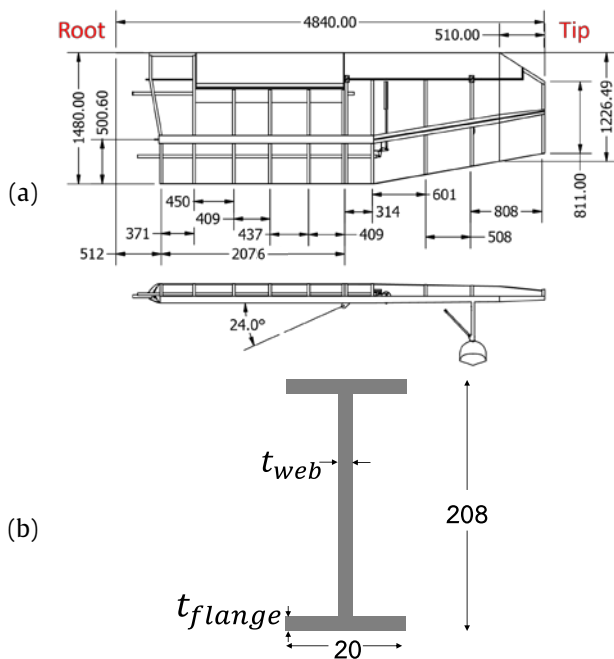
(a) Drawing of the wing (top and front view); (b) spar I-beam cross section at the root (all units in mm).
